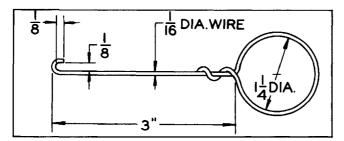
B-29 Wire Hook For Installing Throttle Return Spring—Carter
